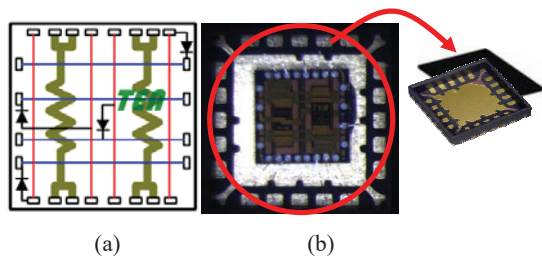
(a) Schematic of Thermal Test Chip (TTC-1002) used to create QFN test-device [20], (b) Wirebond and die attach process between the QFN cavity and TSP element (TTC-1002) cover with a flat after a cure process
